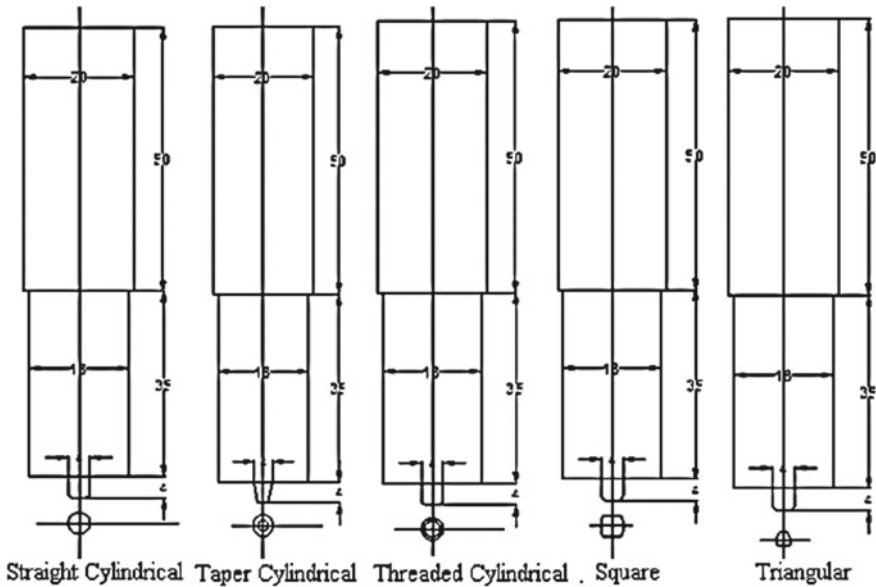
Friction stir welding tool pin profiles [17]
